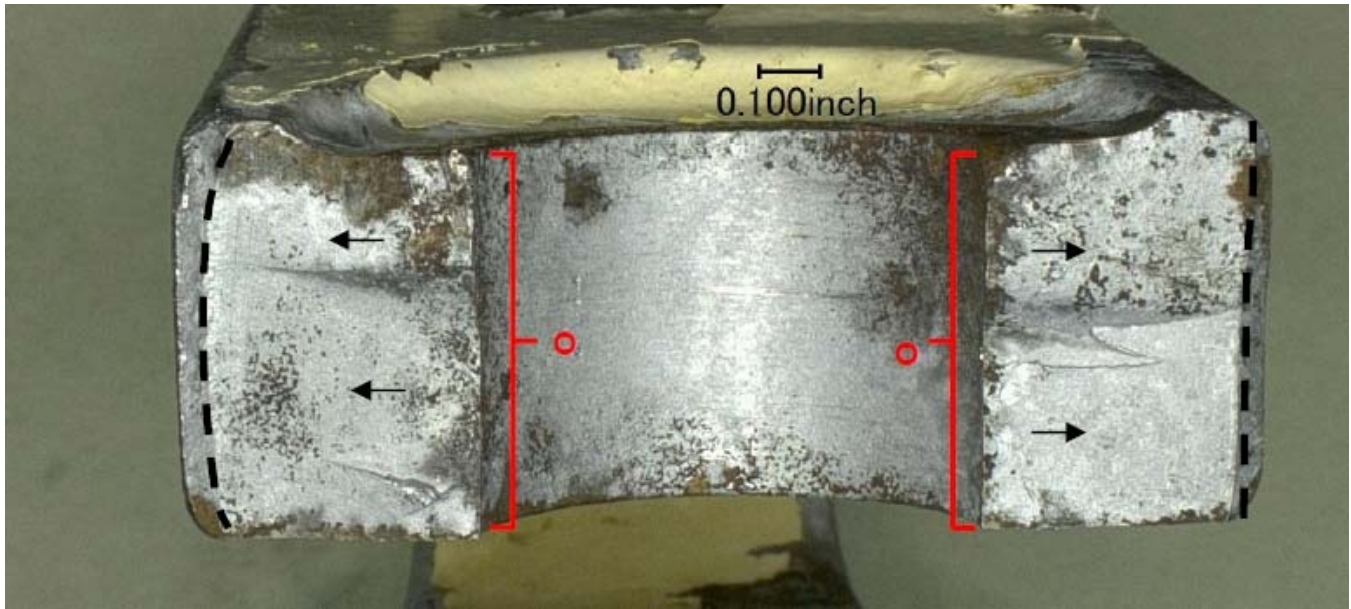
Right outboard wing forward spar, Lower fitting, Lower arm.
